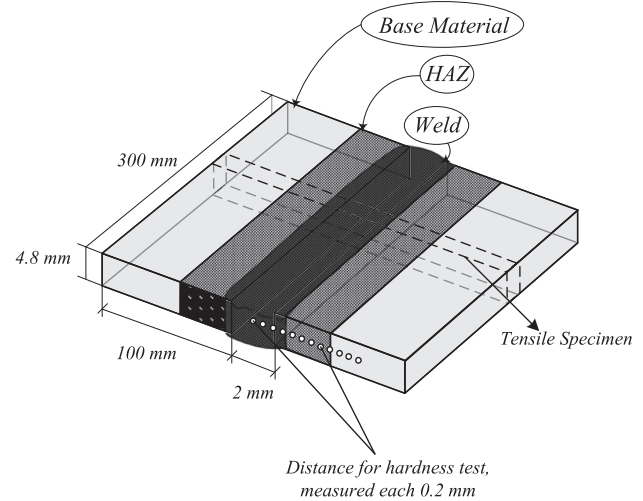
Welded plates with dimensions and the representation of a tensile specimen.
